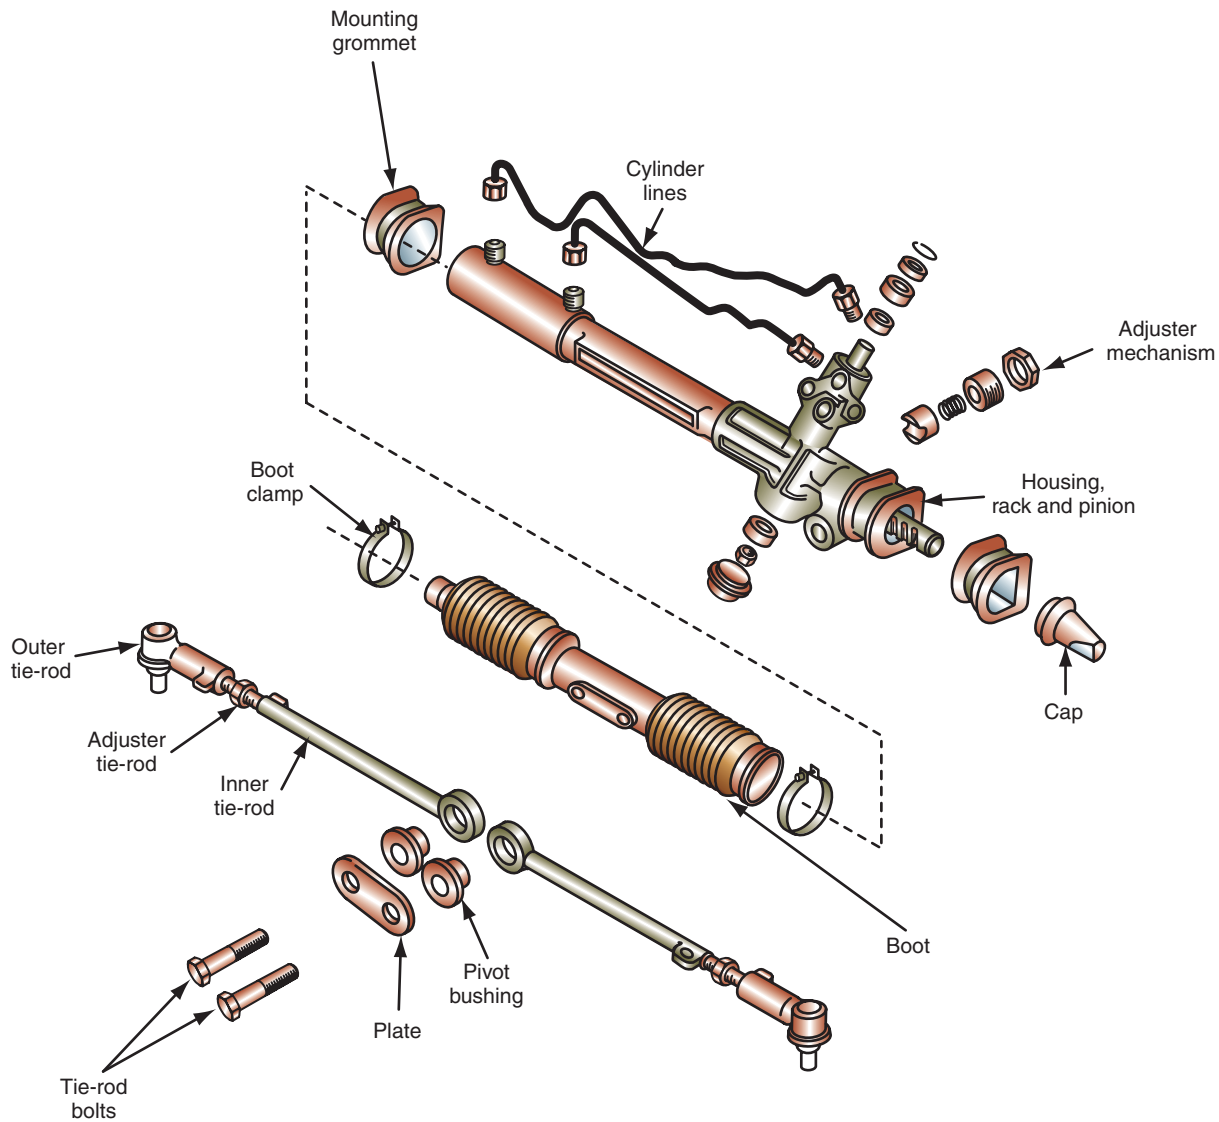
Saginaw and TRW power rack and pinion steering gear.
